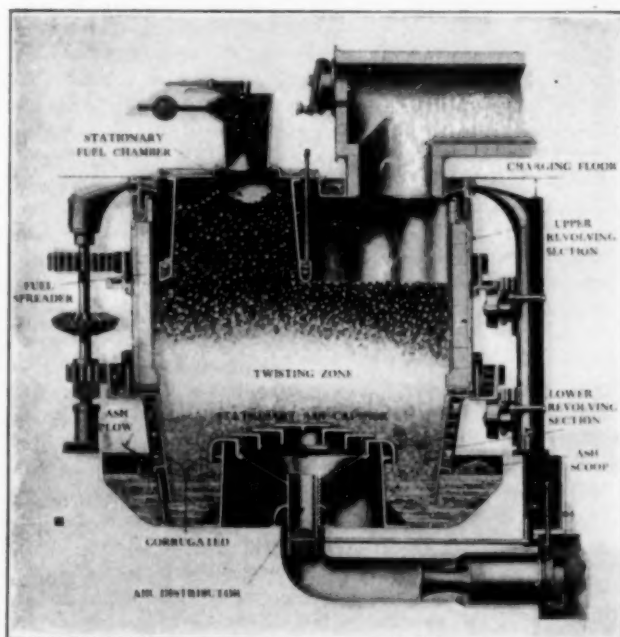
SECTIONAL VIEW OF CHAPMAN ROTARY GAS PRODUCER.
